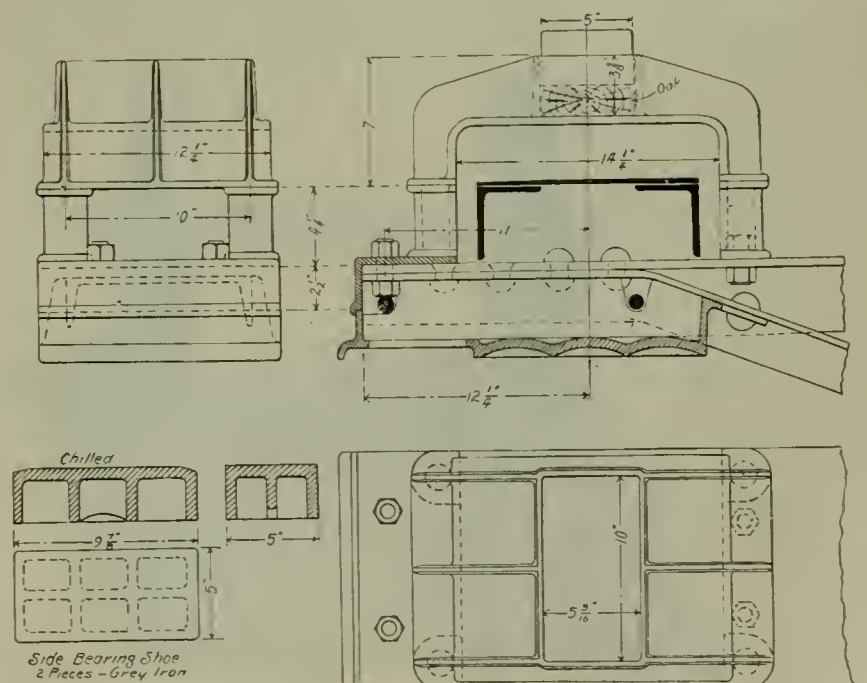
SIDEBEARING FOR NEW STEEL PASSENGER TRUCK.
